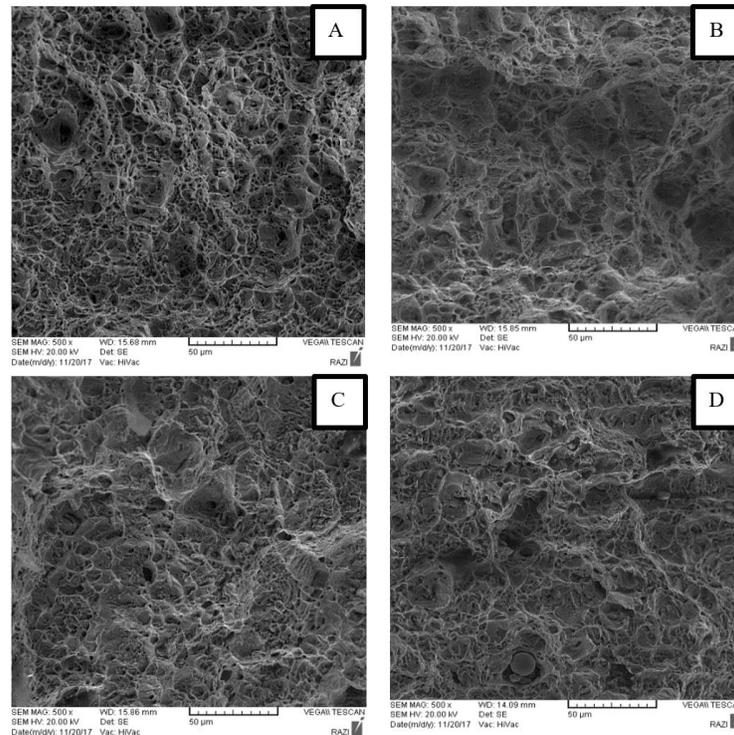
SEM image of the fracture surface after tensile test before and after pressing, A) Rolling sheet (before pressing), B) One pass, C) Two passes, D) Three passes
